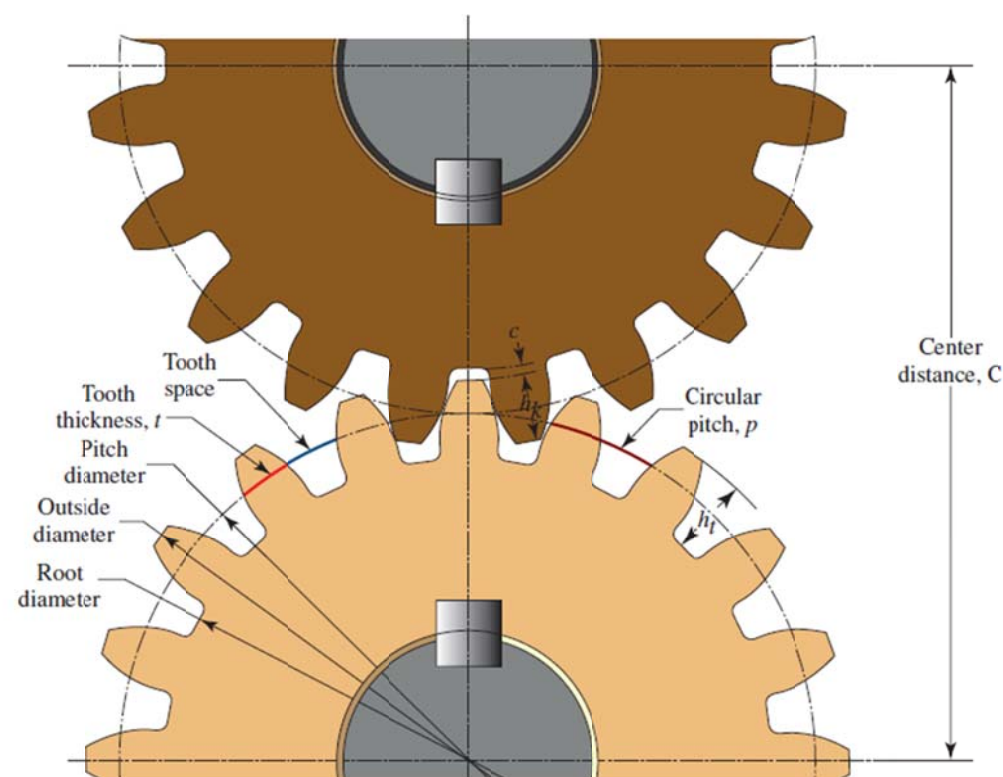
Details of two meshing spur gears showing several important geometric features.
